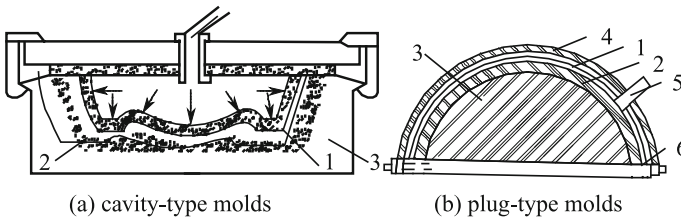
Diagram showing prepreg/pressure bag processing. 1 Rubber bag; 2 part prototype; 3 molds; 4 outer shell cover(steel); 5 nozzle; 6 bottom plate
